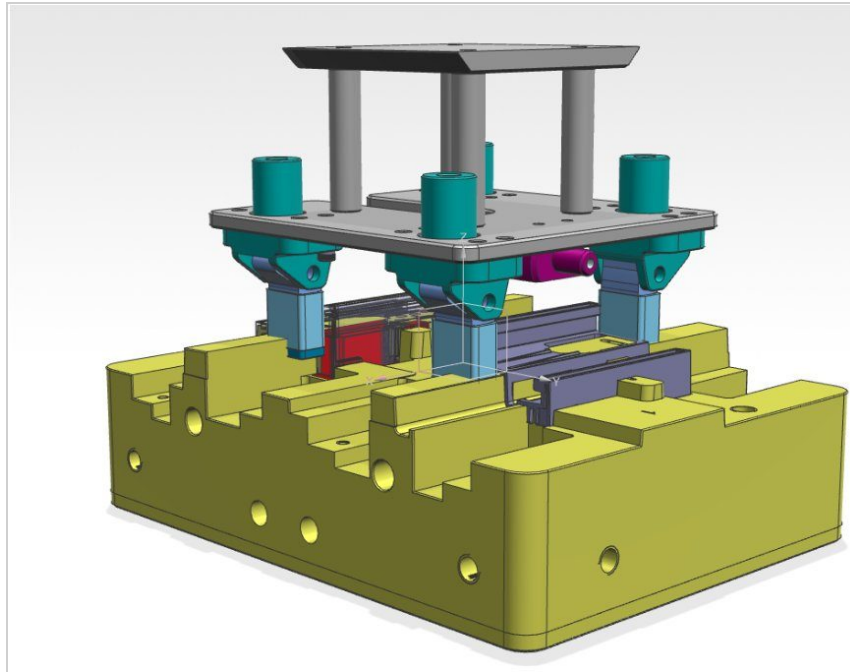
Tooling for the first product. Grippers and locating features sit on a mounting plate above the open mold.
